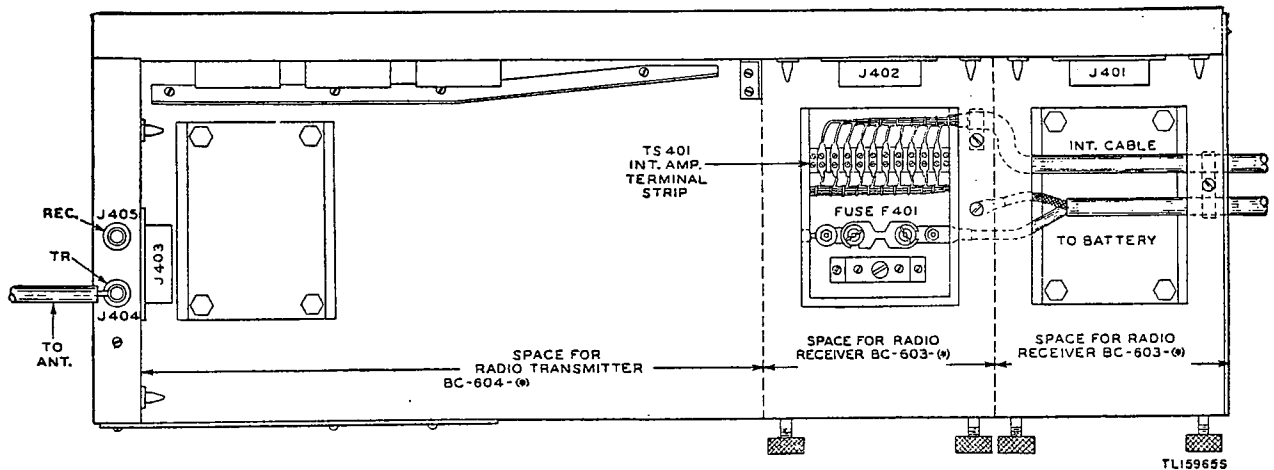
Mounting FT-237-(*), location of transmitter and receivers.
